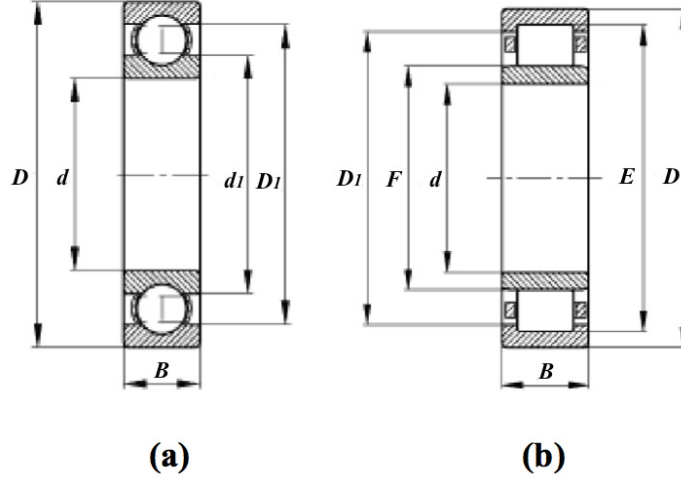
(a) Deep groove ball bearings, and (b) cylindrical roller bearings [77]
